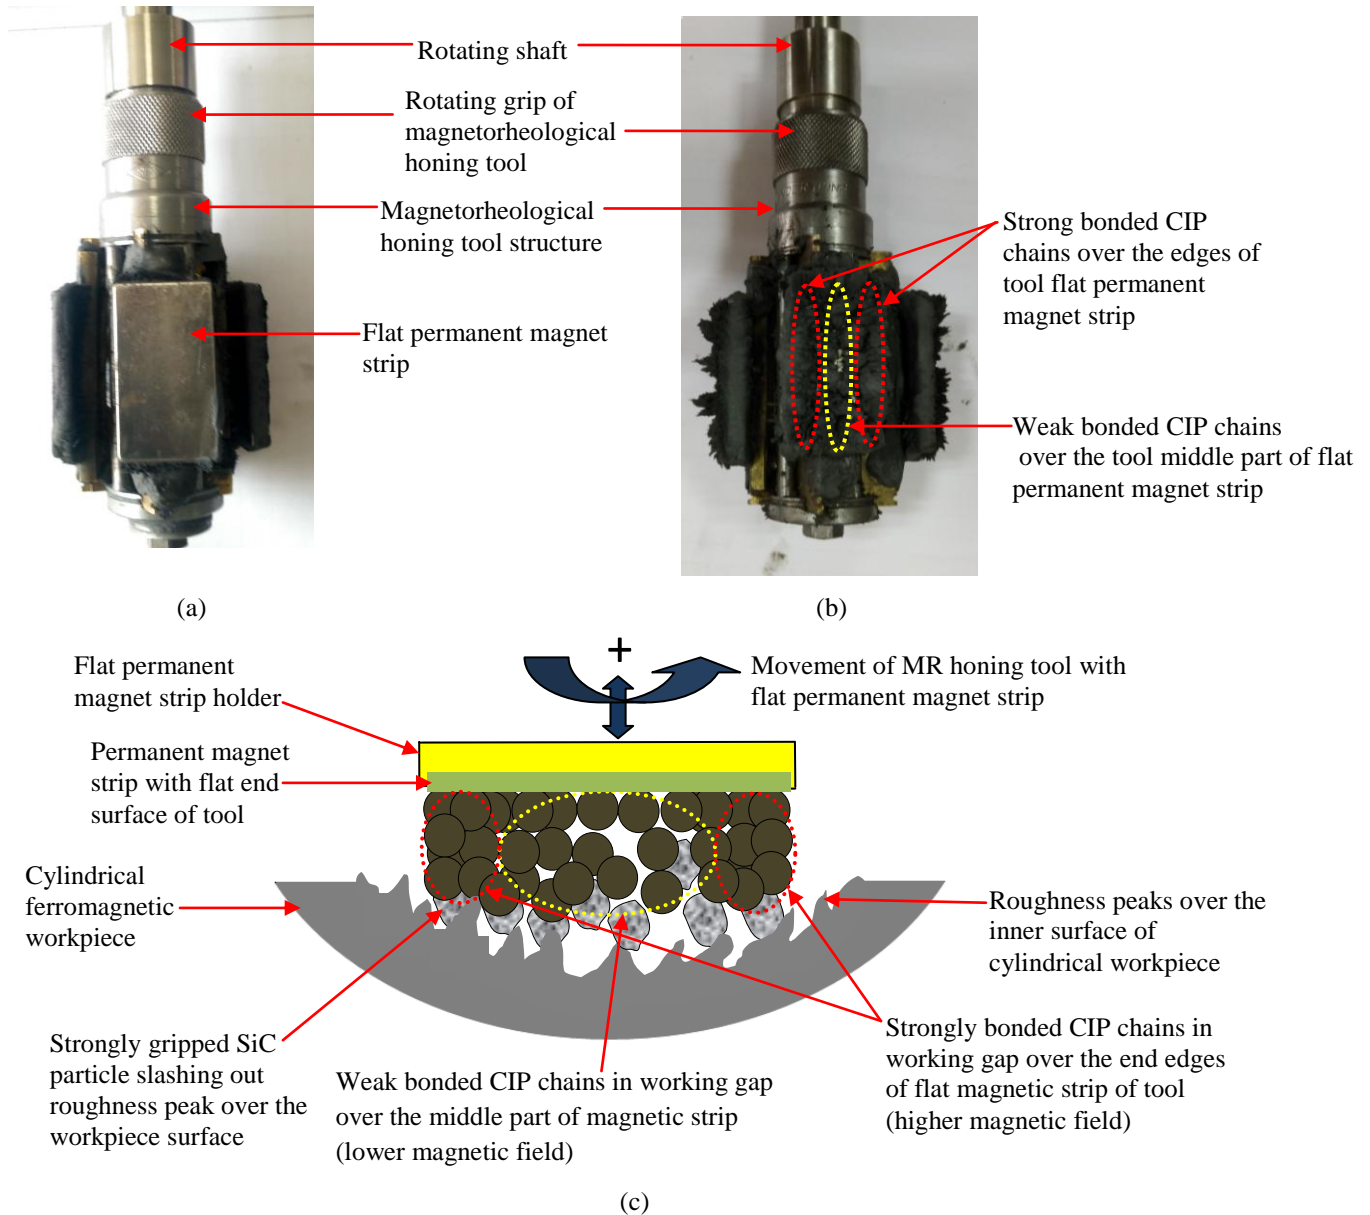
(a) Photograph of fabricated initial design of MR honing tool with four flat permanent magnet strips, (b) photograph of fabricated initial design of MR honing tool with retained MR polishing fluid over the four flat permanent magnet strips and (c) mechanism of material removal with a magnetorheological honing tool having flat permanent magnet strip with ferromagnetic cylindrical workpiece.
